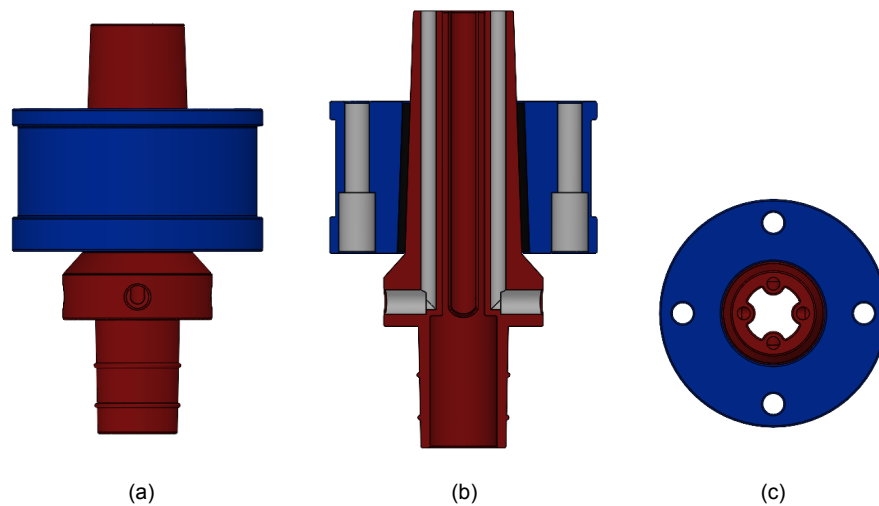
The final connector, consisting of an inner red and outer (blue) part. (a) Side view of the assembled connector. (b) A cross-section, the inner cavities to connect the vacuum and water are shown in grey. (c) Top view of the connector, assembled.
